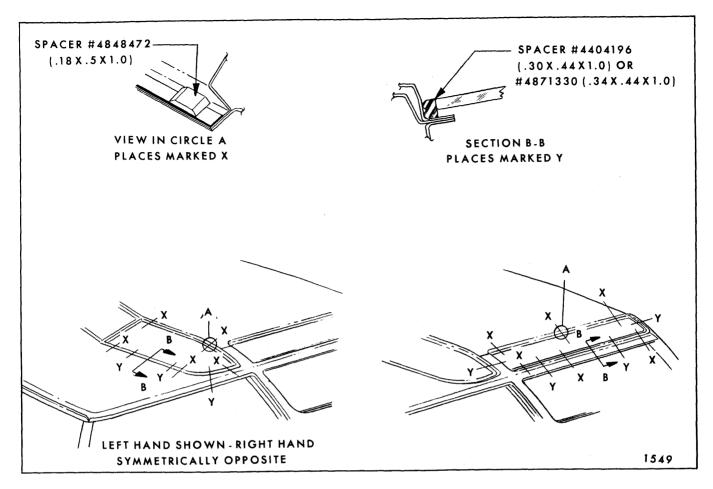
Front and Side Skylight Rubber Spacer Installation
